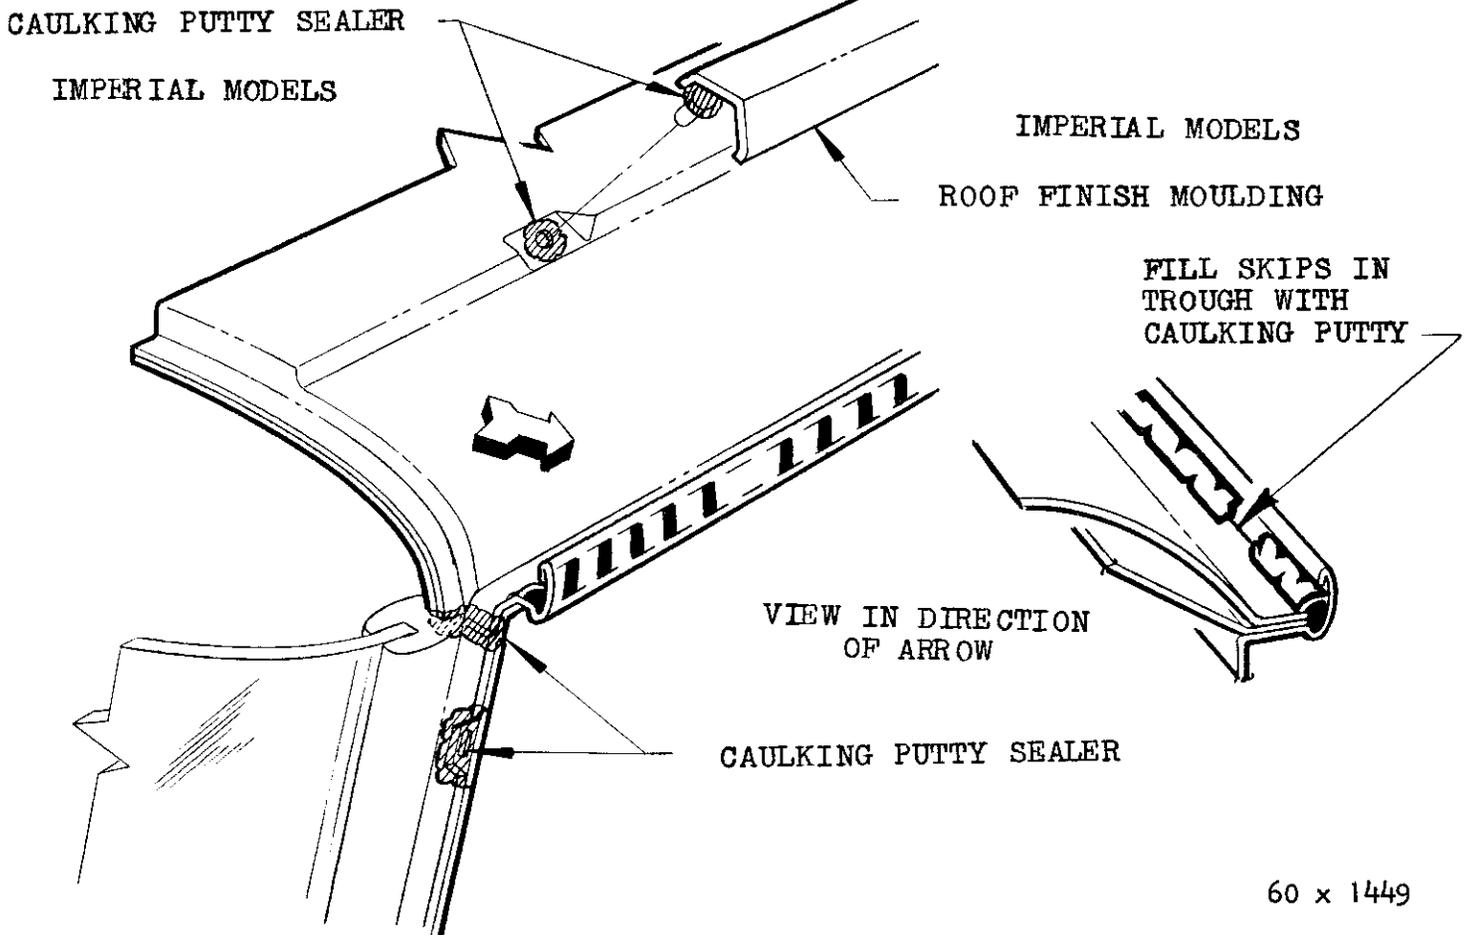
Sealing Rear Window Glass and Roof Moulding
